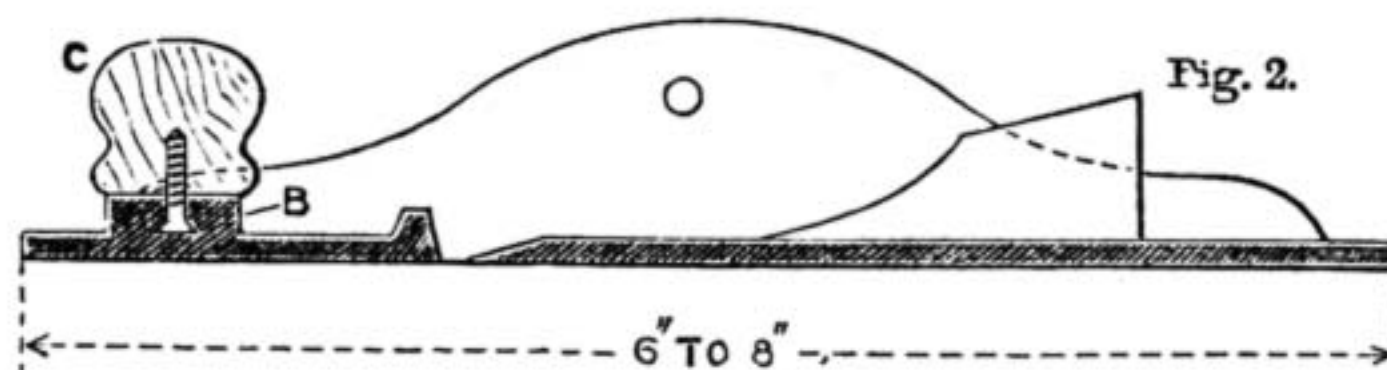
Casting for Block Plane. Fig. 2.—Section through A A.
